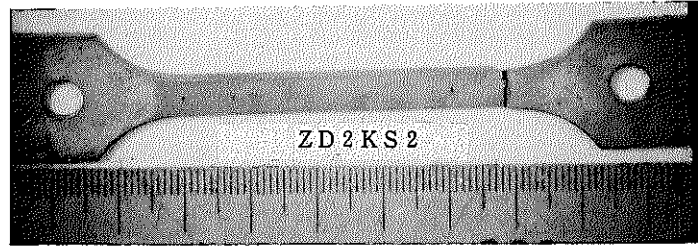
Fracture appearance of irradiated wrapper tubes for tensile specimens.
